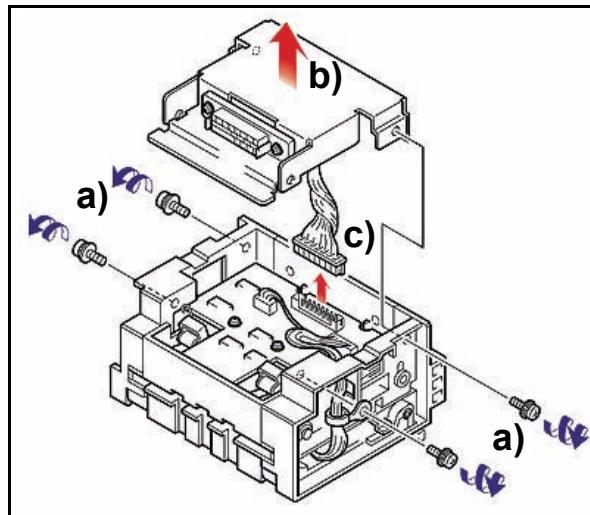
WBA Acceptor's Lower Sensor Board Cover Removal
